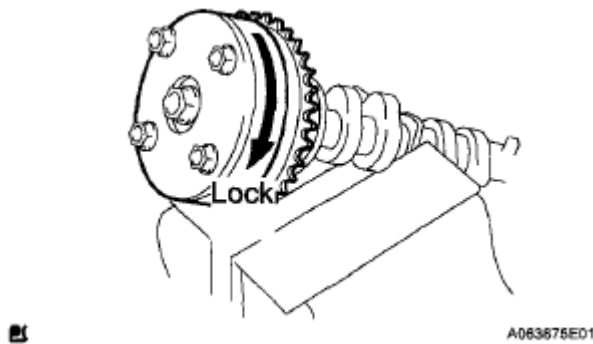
Turning Camshaft Timing Gear Assembly Retard Direction (Clockwise)
